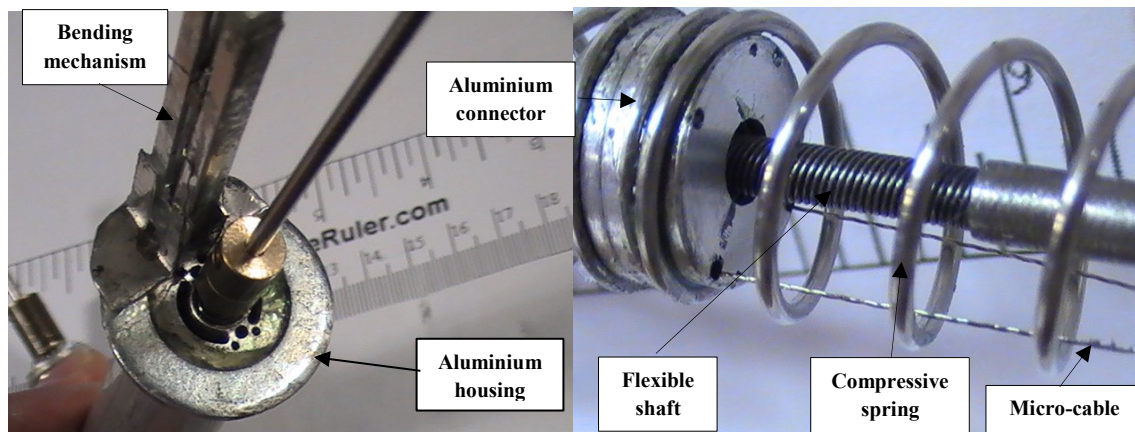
Assembled parts of the prototype, the attachment of the bending tool to the one of the end housing (left), and the attachments of the spring to the mid connector and the positions of the flexible shaft and the micro-cable (right)
